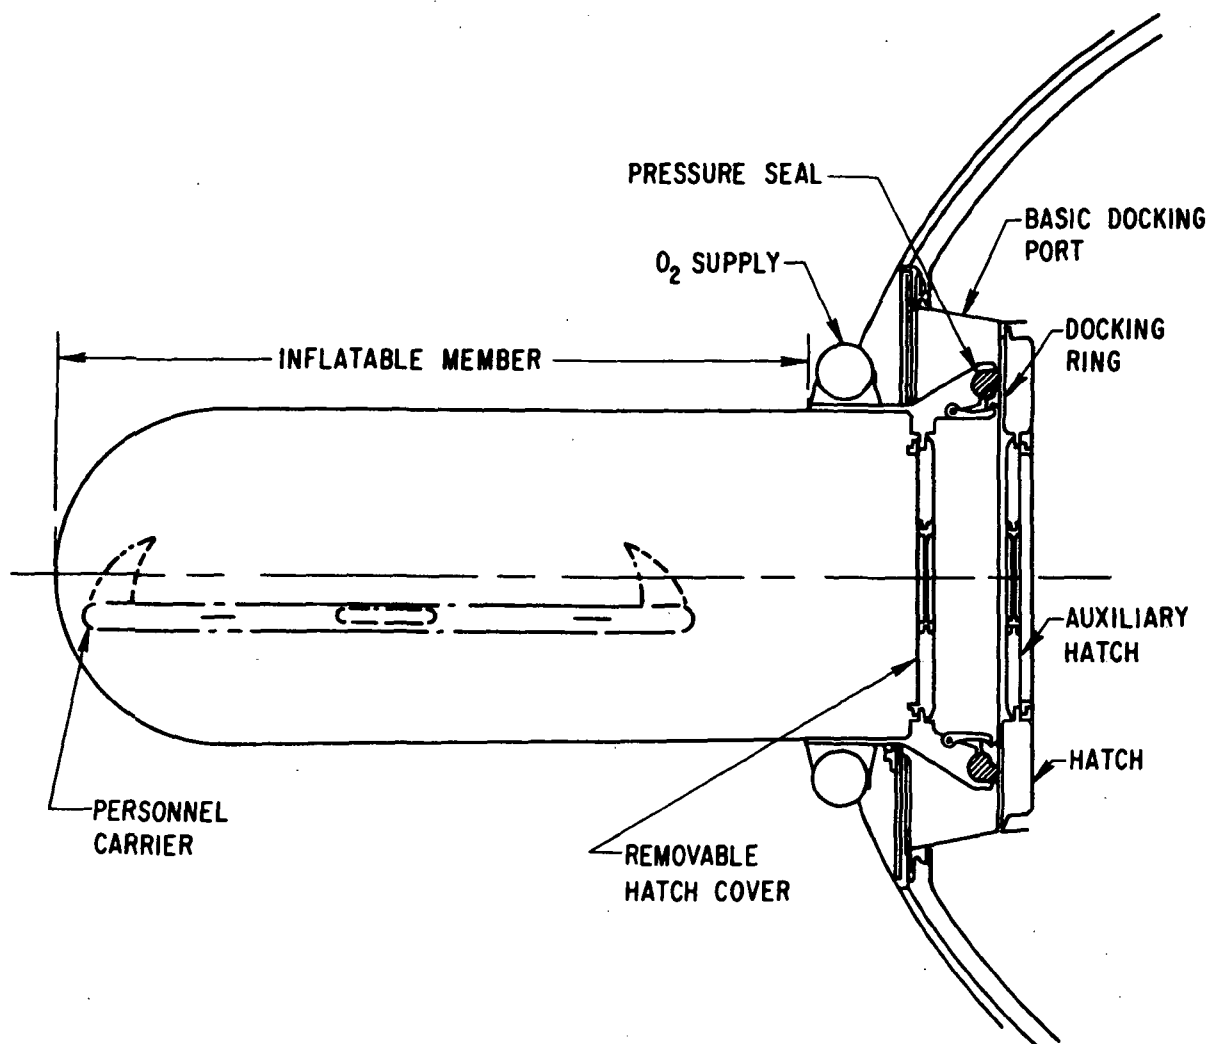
Expandable Transfer Capsule (Ref. 4)
